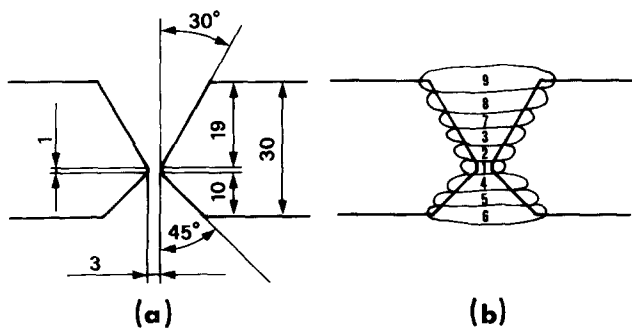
Details of the weld process: (a) shape and dimensions (mm) of the asymmetric double-V groove profile; (b) sequence of weld passes.
